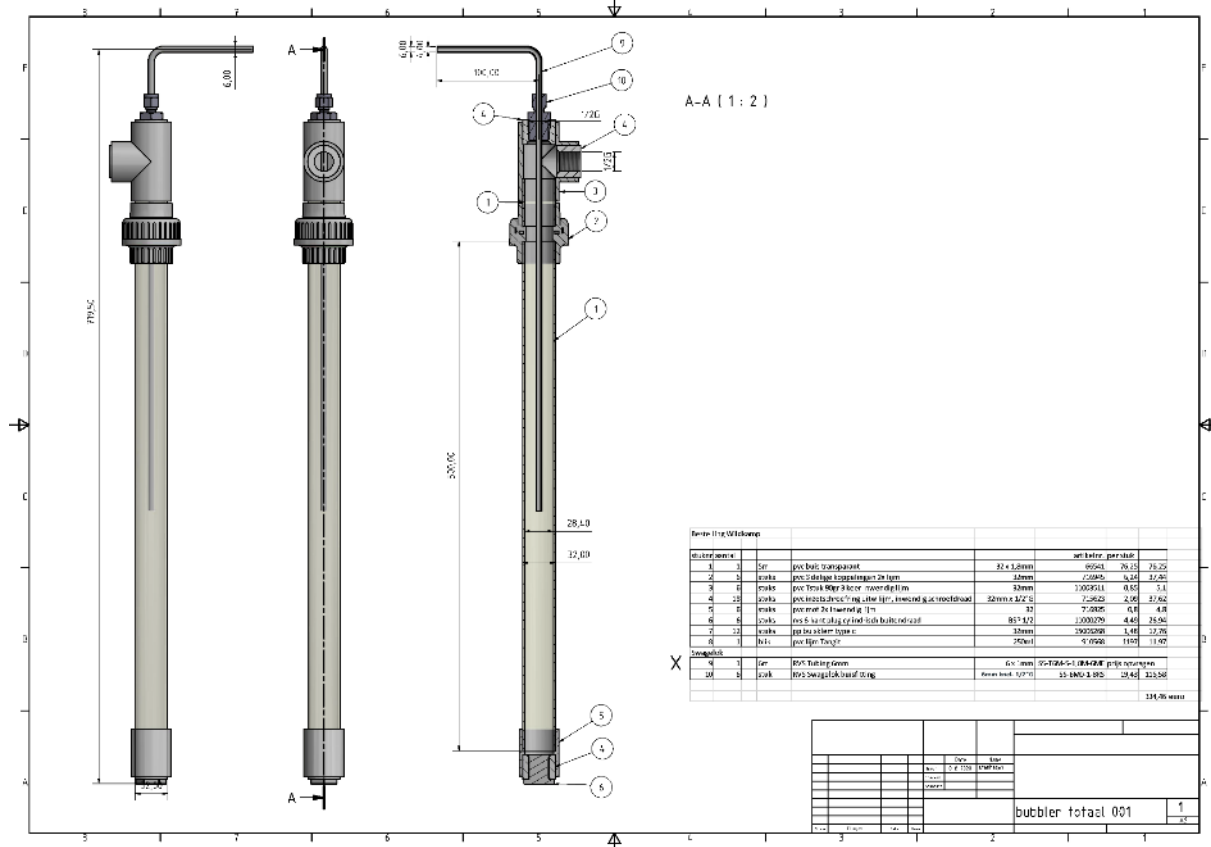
Technical drawing of the humidifier column. The measurement unit is mm.
